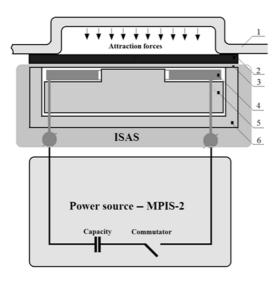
The principle scheme of the dent removing with help of the "Inductor System with an Attracting Screen (ISAS)": 1 – is the sheet metal blank, ISAS; 2 – is the accessory attracting screen; 3 – is a dielectric insert; 4 – is the external exciting inductor, 5 – is a dielectric compaction; 6 – is the dielectric body; power source – MPIS-2 (Magnetic Pulse Installation Series with 2kJ energy stored): is a capacitor storage; is a block of thyristor switches
